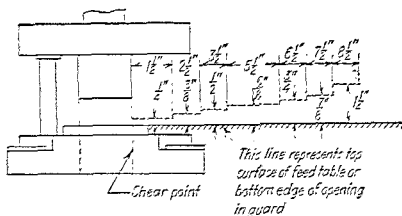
Safe opening dimensions for punch-press guards.⁴
